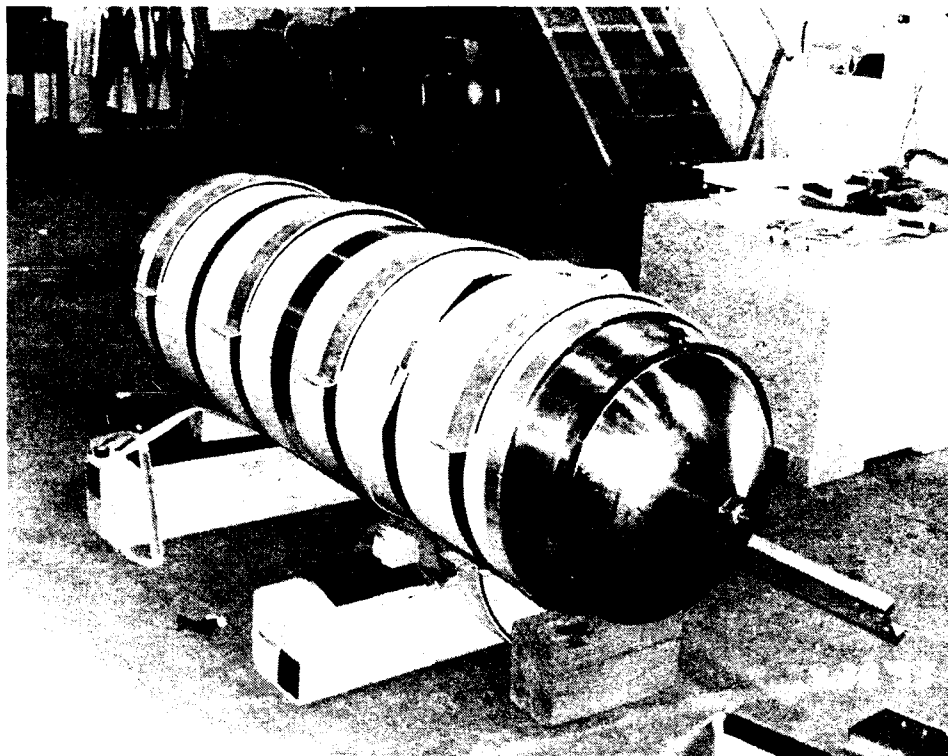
Assembly of test fixture cage before pressure testing of 26-inch-housing cylindrical hull assembly.
